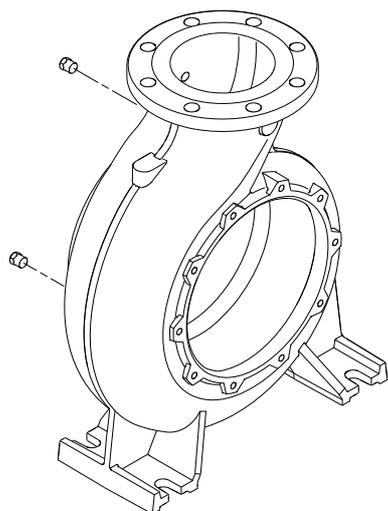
Static pump O-rings for seal arrangement "C, D, O and P"
